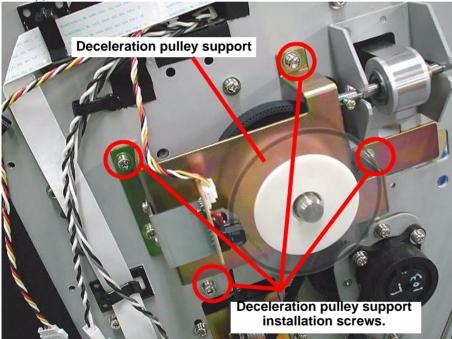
Taking Out the Deceleration Pulley Support Installation Screws
